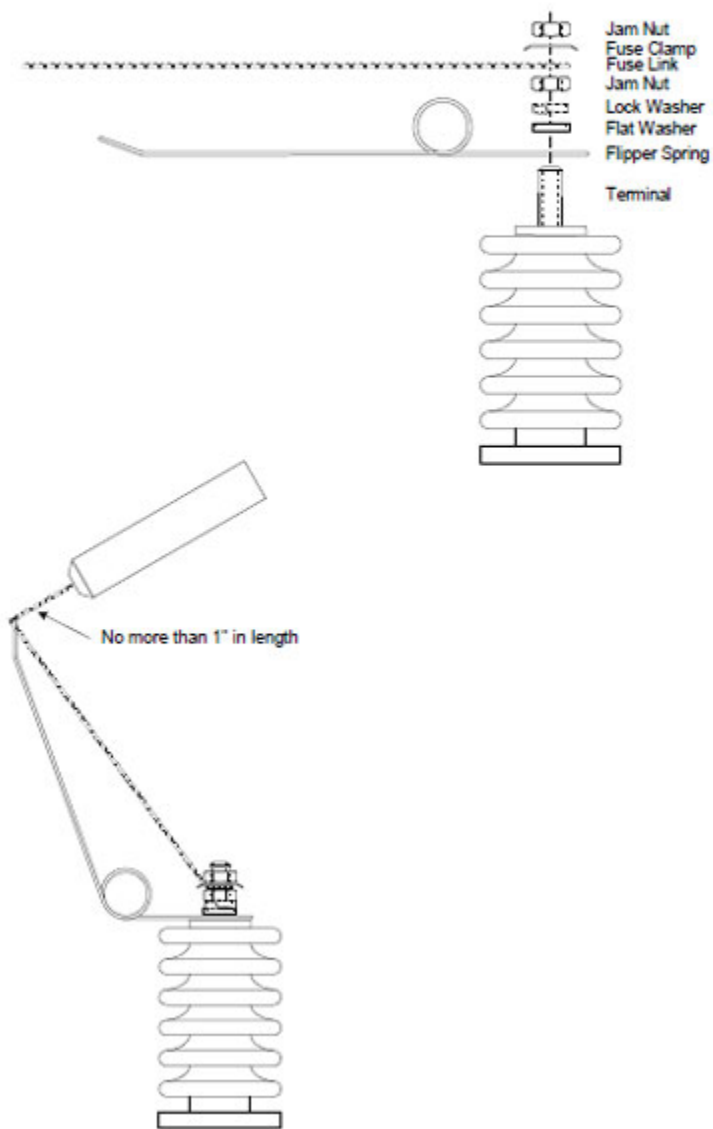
Fuse Element – Horizontal Bushing Assembly
